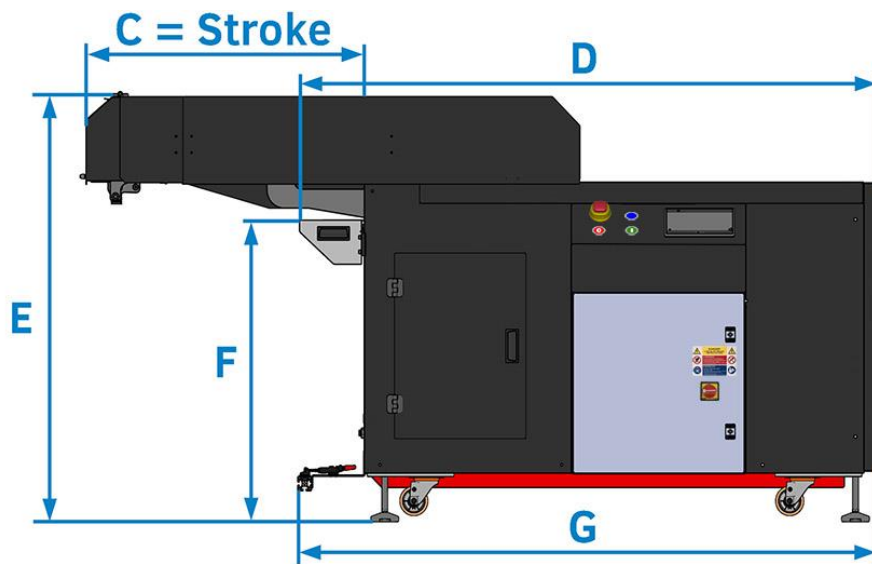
MACHINE DIMENSIONS SIDE VIEW
